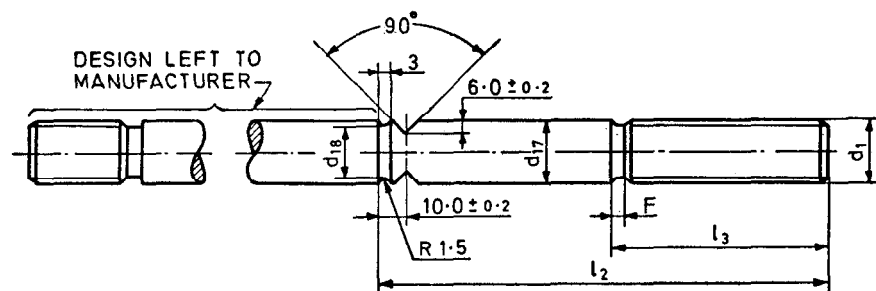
STEM (FOR 36 kV/630 A RATING)
